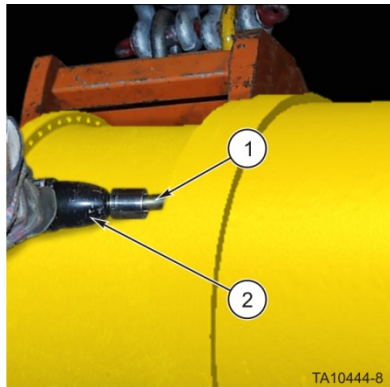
Lifting fixture (p/n 421-7253) for model 51A3 planetary drive
